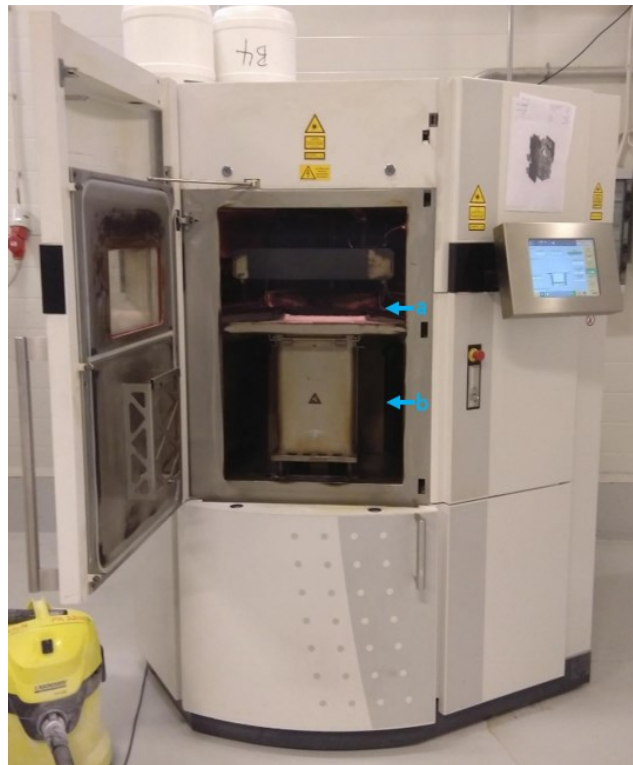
EOS Formiga P100 SLS machine. a: Process chamber. b: Removal chamber. Courtesy of Ajatec Prototyping OY.
